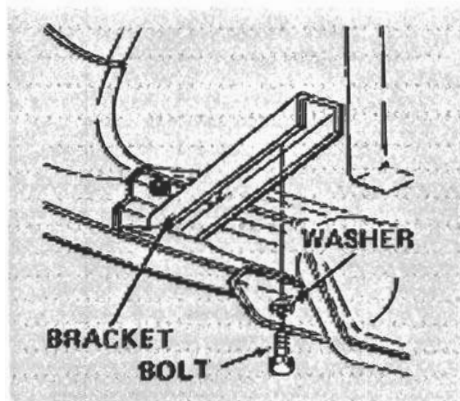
One of the two bolts that hold the rear bumper bracket on the frame side member.
